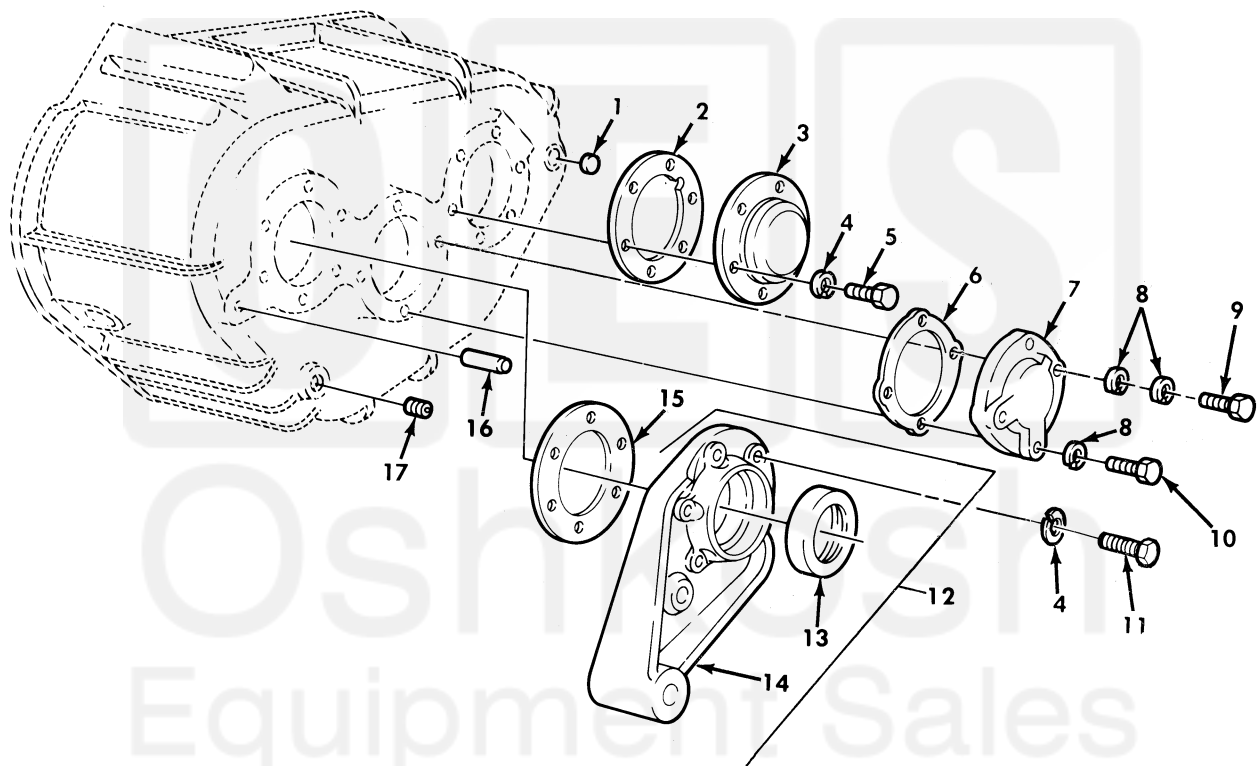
Transfer Case Covers, Cap, and Seal Assembly.
